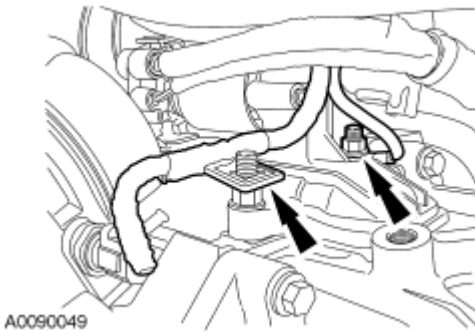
Locating Wire Harness Clip Retainer & Starter Bolts
